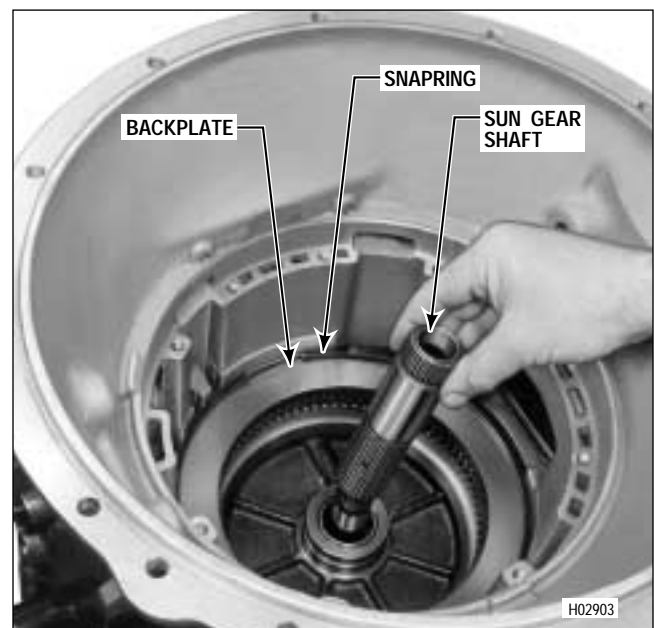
Removing Sun Gear Shaft Assembly (Models Without Retarder)
